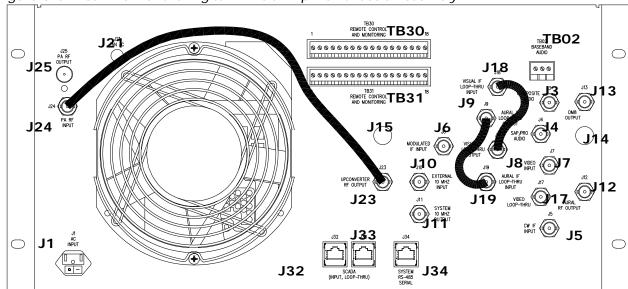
Rear View of the Digital Driver/Amplifier Chassis Assembly
